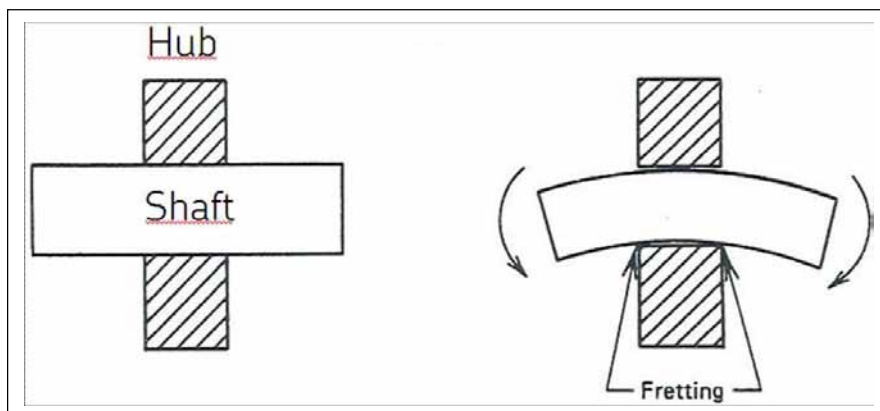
Straight shaft seat critical fretting points (Ref. 14).
